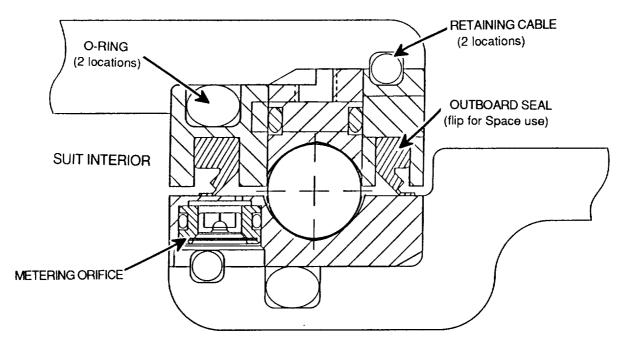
AX-5 Bearing Joint Configuration for Underwater Tests
